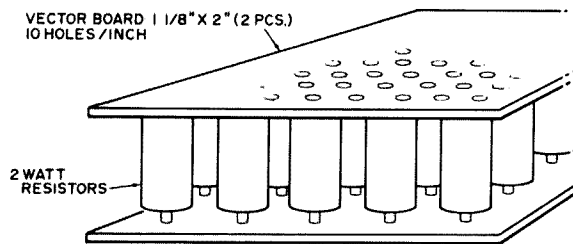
Sketch showing details of resistor "sandwich" assembly.
